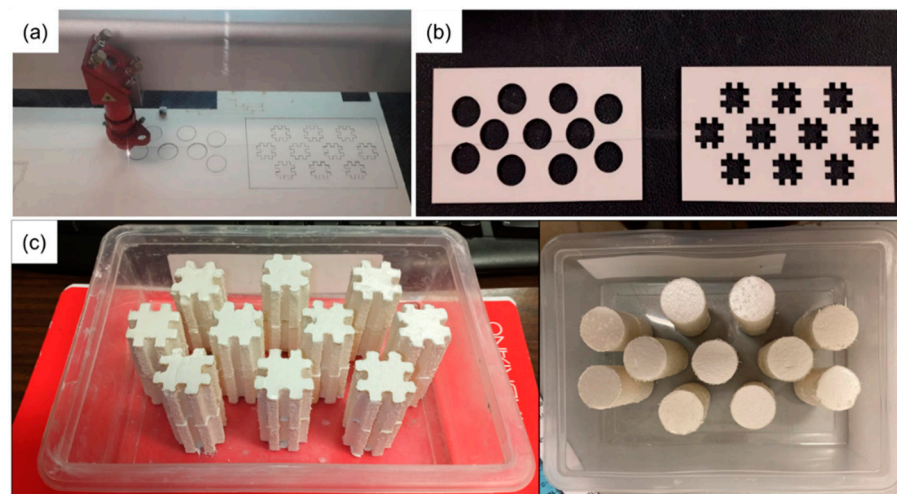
(a) Laser cutting of the guide-masks, (b) CHD and FHD guide masks, and (c) mold brick for FHD and CHD design.
